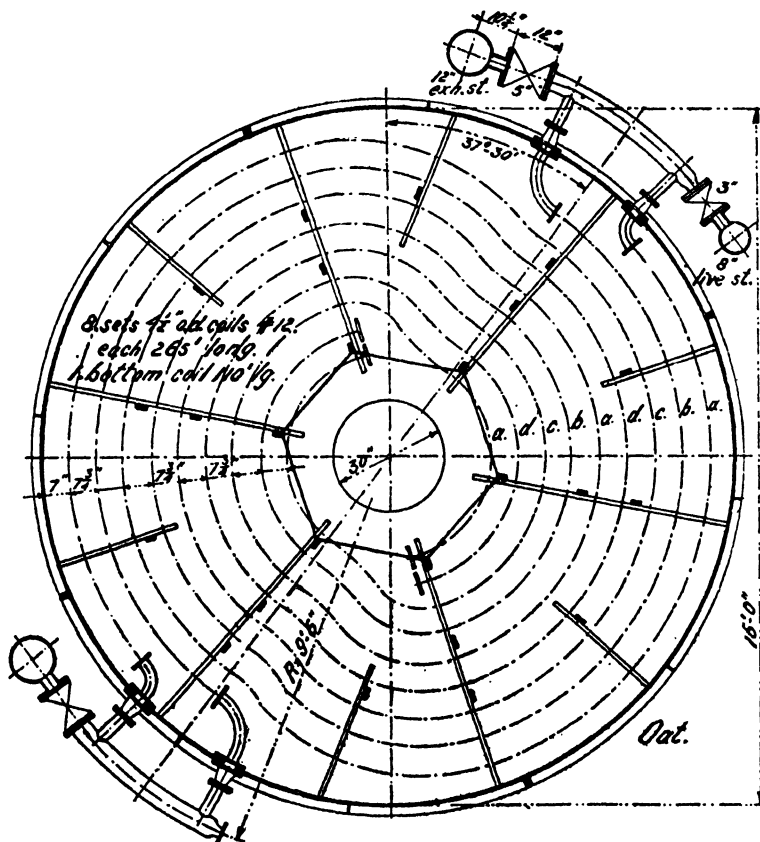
Coil Arrangement in Large Vacuum Pan.
